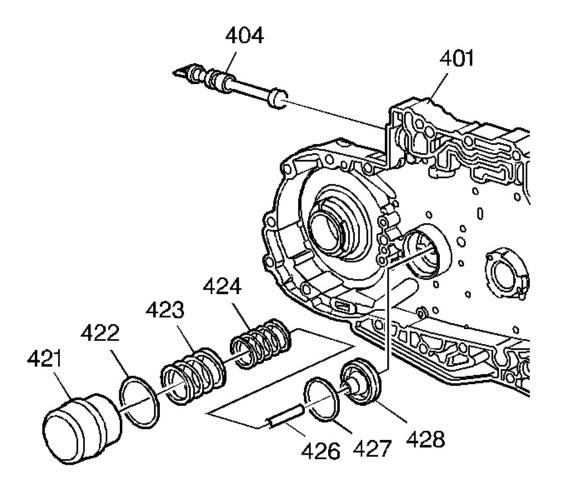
Locating 3-4 Accumulator Piston Components Courtesy of GENERAL MOTORS CORP.
